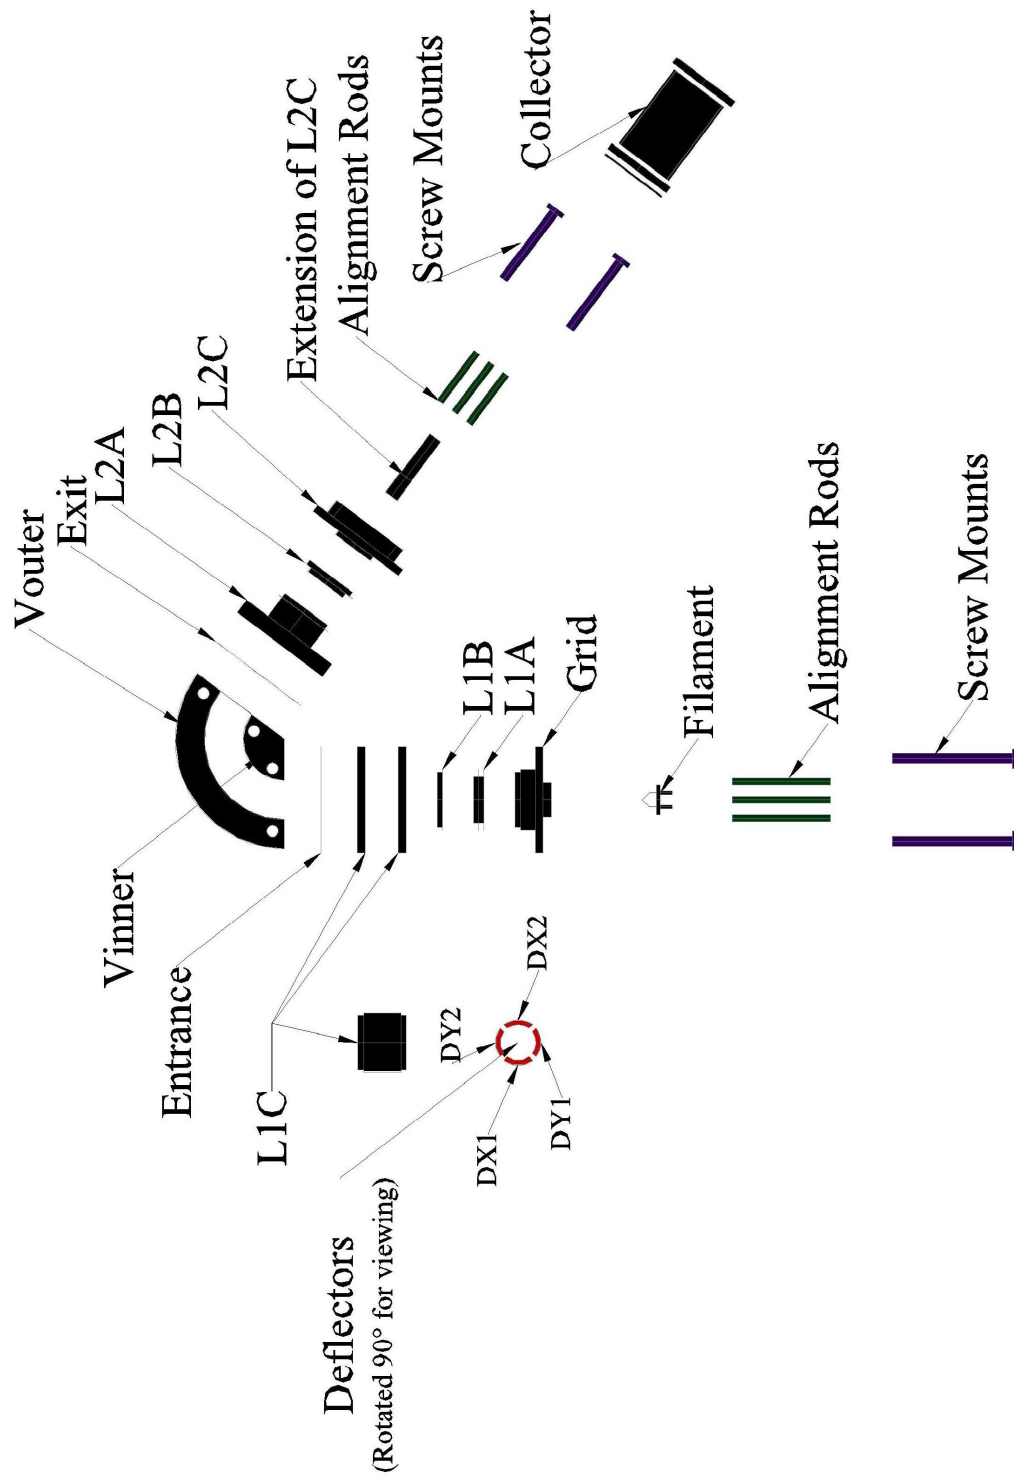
An exploded view of the electron gun, with each piece labeled.
